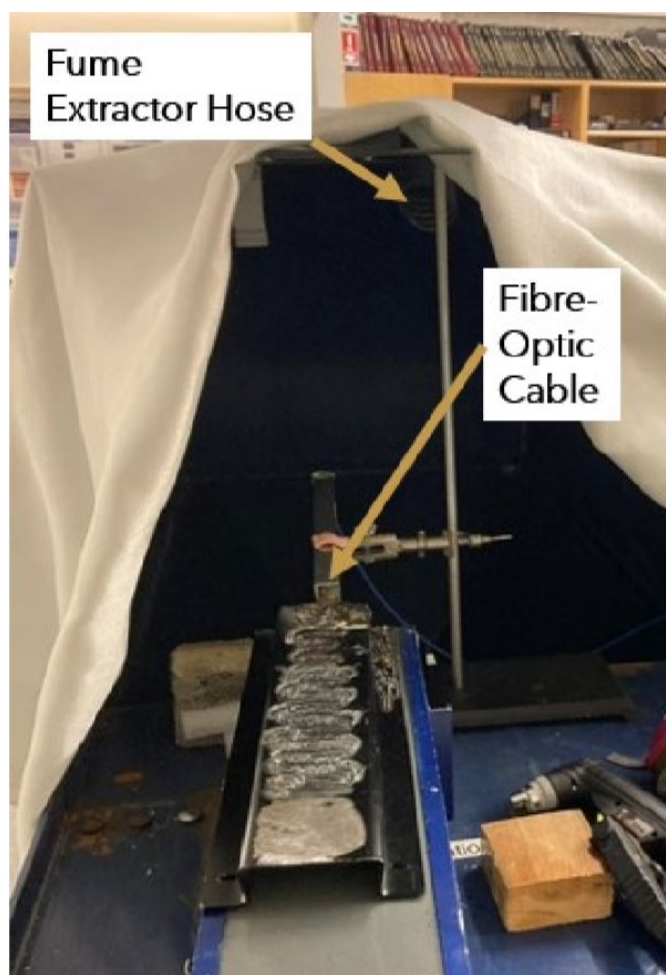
Setup for cutting metal components from above with the torch. Fibre optic cable held in place with retort stand and clamp.
